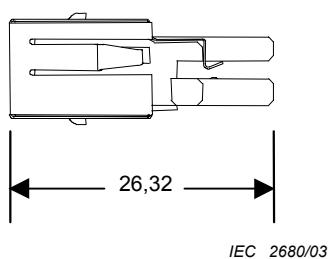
Side view fixed board connector (XB) straddle mount (version 2) (TB)
